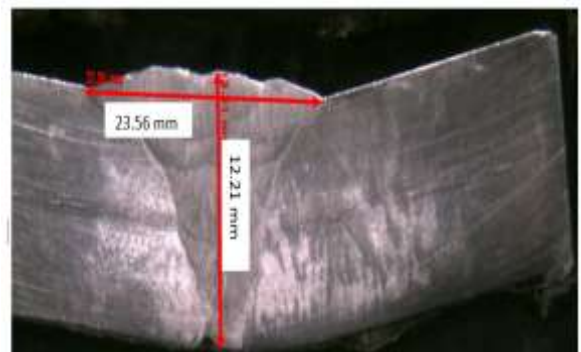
Macroprofile of stainless steel welded at heat input of 2030 J/mm.
